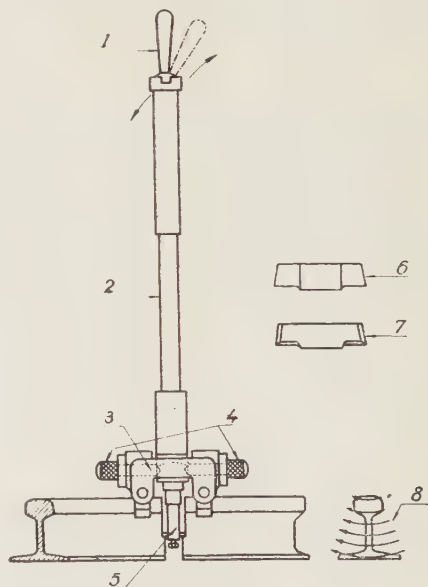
Thermit-pressure welding with inserted plate. Tool for cleaning up the rail ends to be welded.
